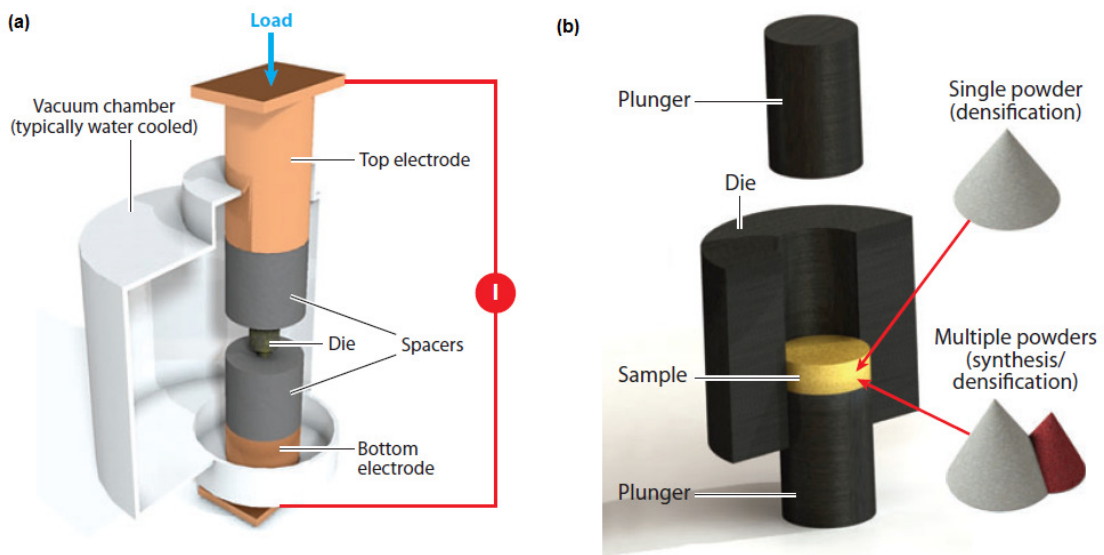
Schematic representation of SPS (a) chamber assembly and (b) graphite die, punches, spacers and sample assembly [102].
